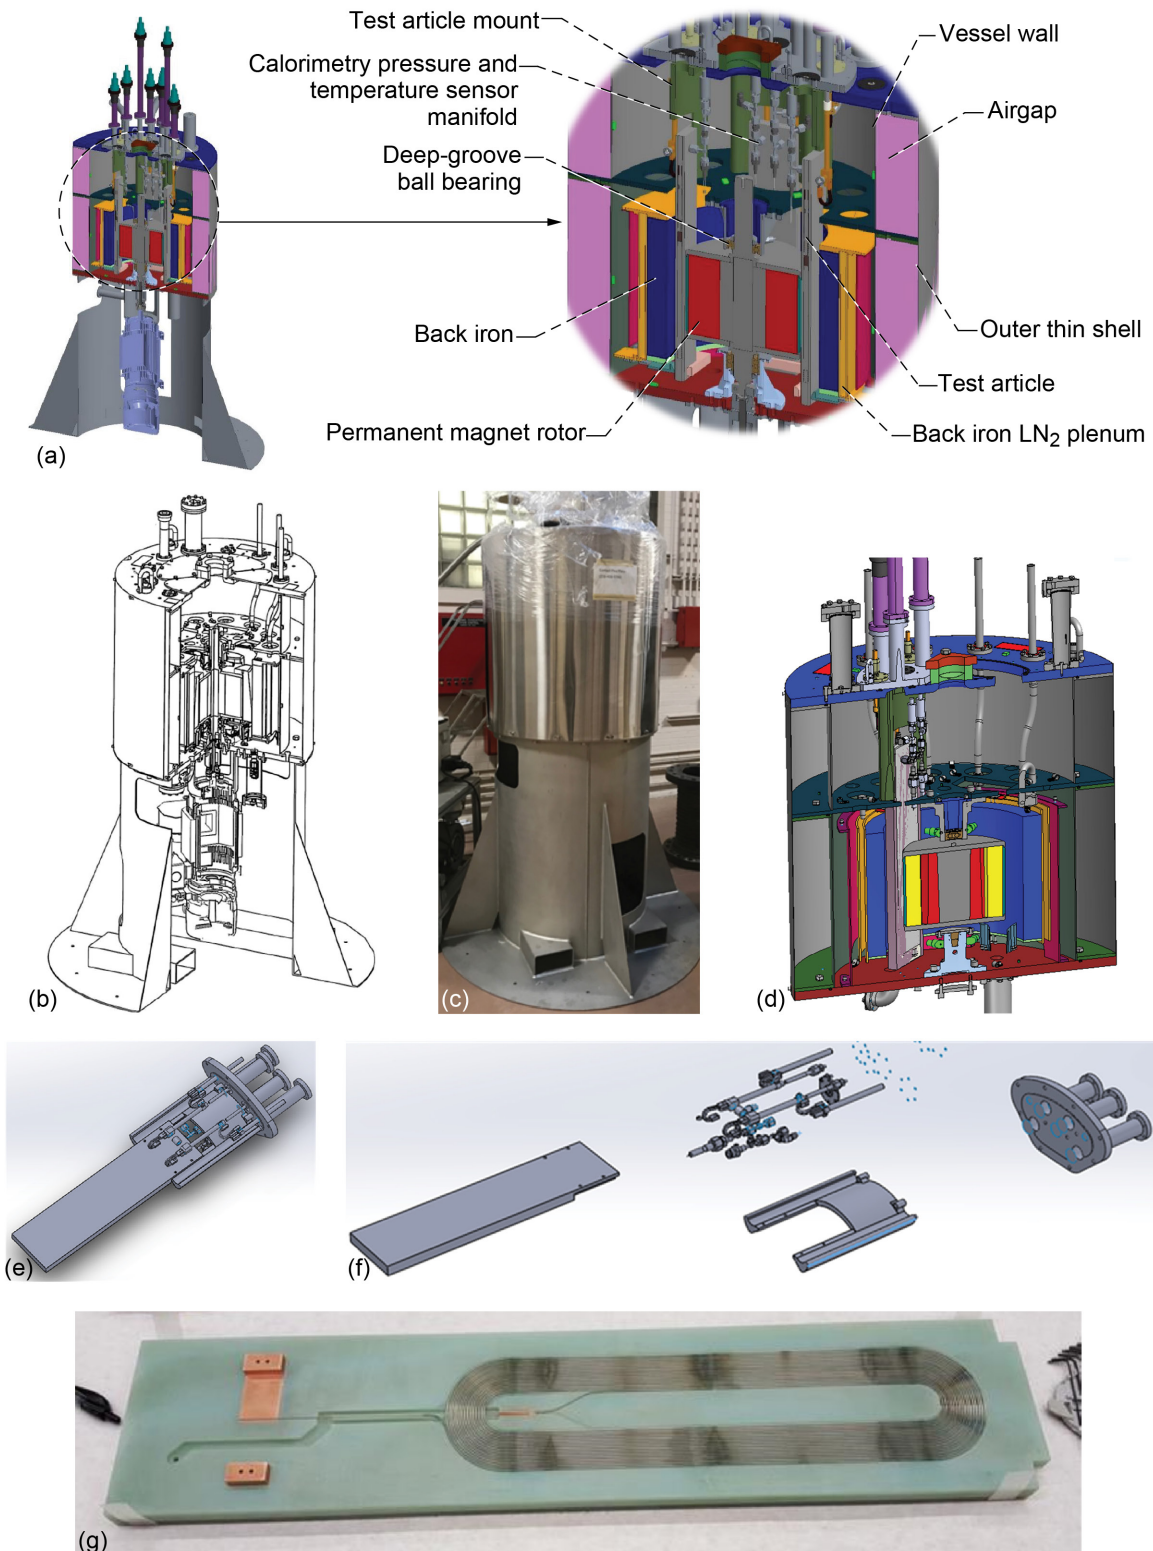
Coil tester rig. (a) Sectioned views of SC coil tester with major parts labeled. (b) Cutaway drawing of coil tester rig. (c) Photograph of coil tester rig before installation. (d) Cross-sectional drawing of rig with coil pack in place. (e) CAD graphic of test article assembly. (f) Exploded view of test article assembly showing coil pack, fluid flow and current supply components, structural support, and top plate with its cryogenic bayonet fittings. (g) One coil shown on coil former with cover plate removed.
